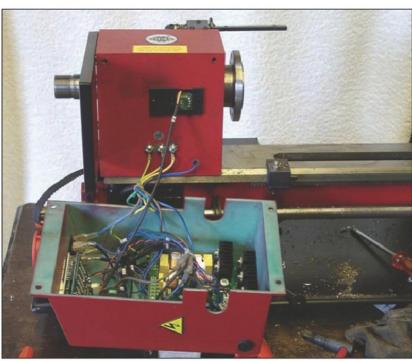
The control panel detached, the sensor board is still held in place on the headstock.
